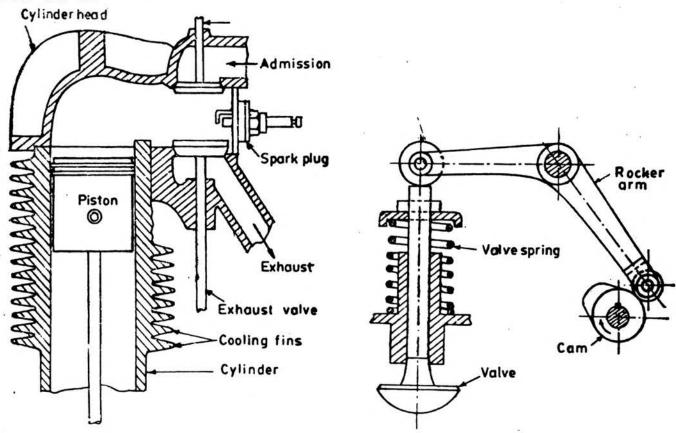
Section of a vertical, air-cooled cylinder of a petrol engine.
